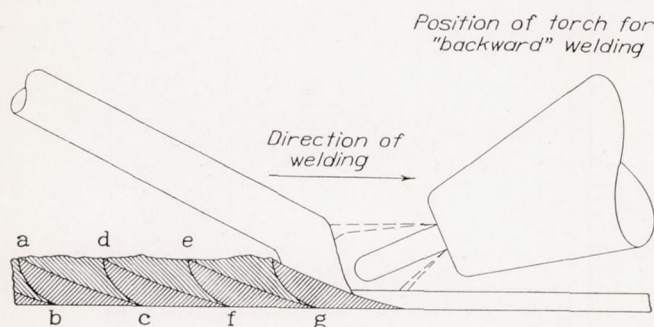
Diagram of bead used in making carburizing flux welds in thin-walled tubing showing how the puddle was made to solidify in increments.
